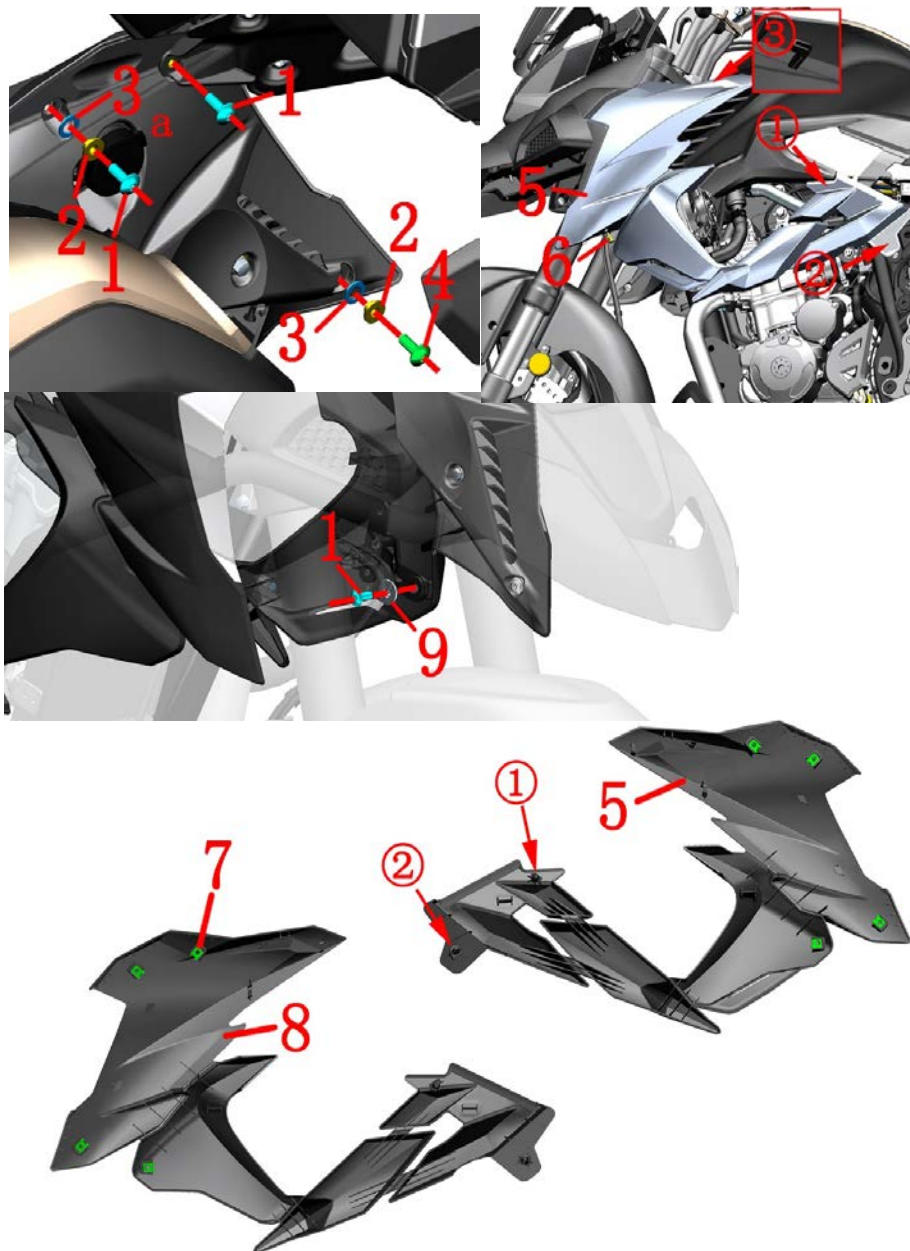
Fuel Tank Assembly		Fuel Tank Decorative Cover Assembly		CHK	CAUTION
